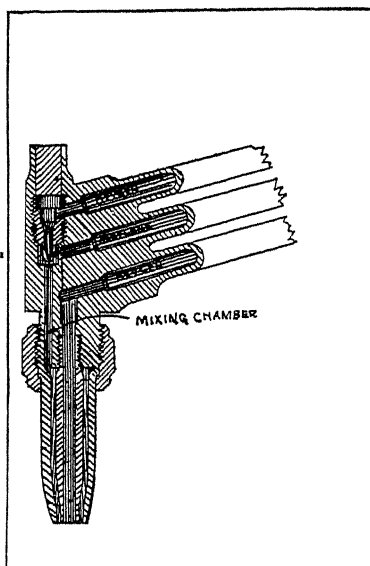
Oxyacetylene Burner for Cutting Steel.
